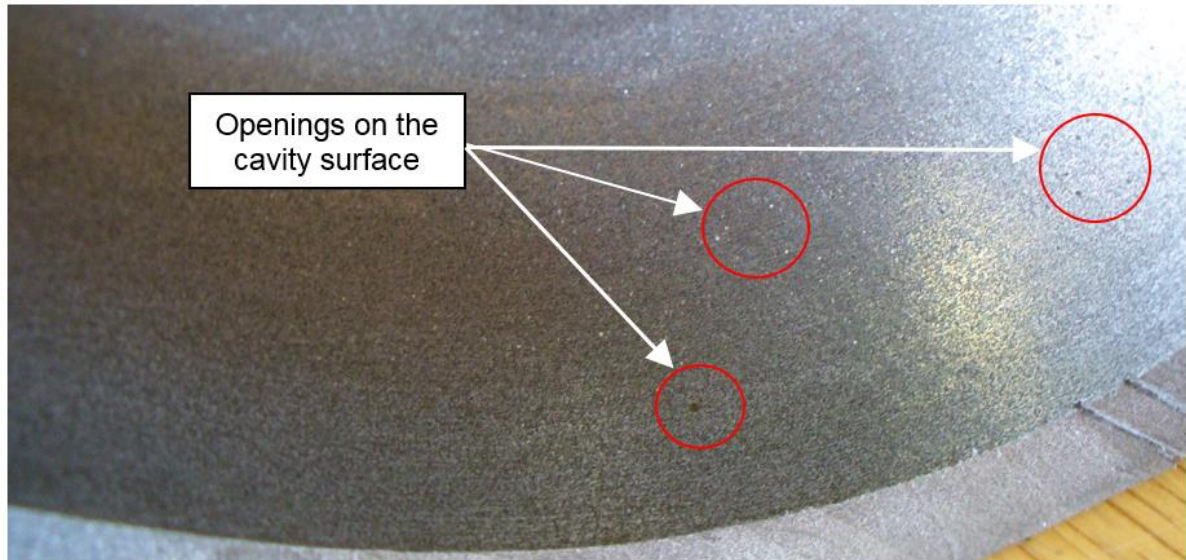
Holes on the cavity surface of the Alumide[®] insert causing a coarse surface finish on the parts manufactured from ABS and PP.
